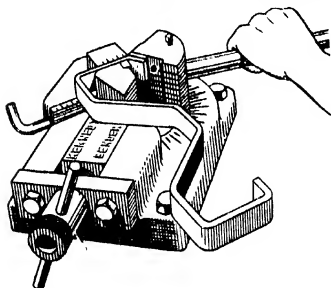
FLAT-BAR BENDER FOR MAKING BENDS CLOSE TOGETHER ON THE TOP DECK
